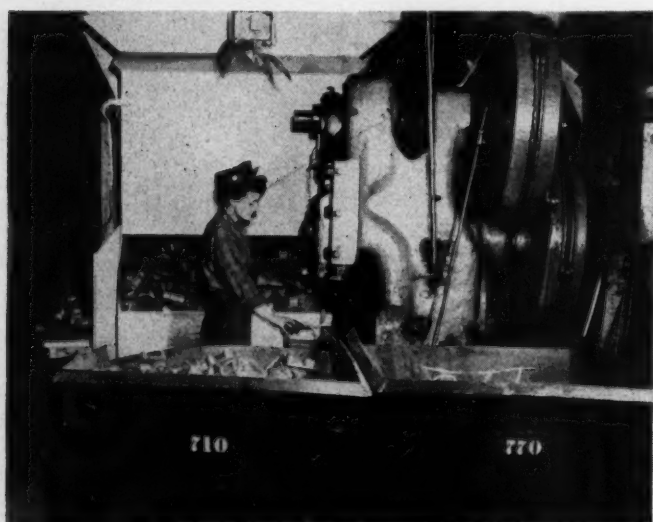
This shearing operation set-up is undesirable because operator must search in box for castings.
